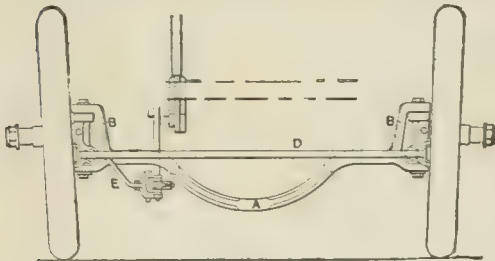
ELEVATION OF AUTOMOBILE FRONT AXLE WITH KNUCKLES, STEERING PIVOT PINS, AND INCLINED WHEEL SHAFTS.
